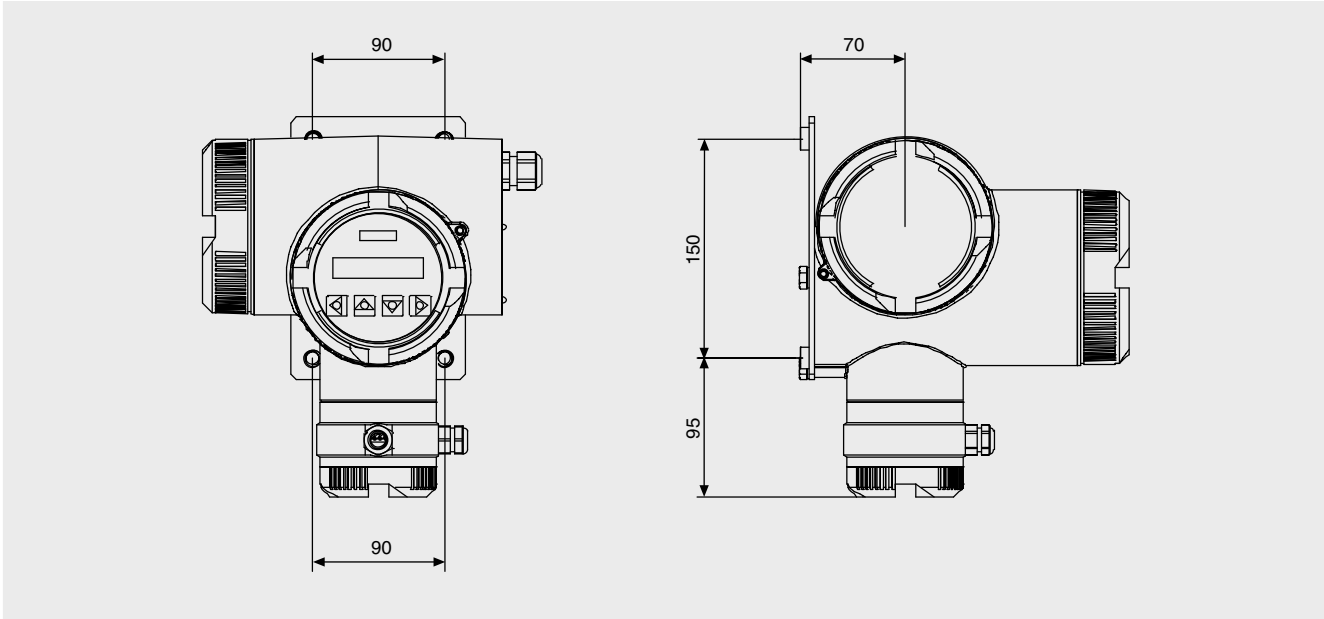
/27 SITRANS F M transmitter Intermag 2 with standard mounting plate, dimensions in mm
